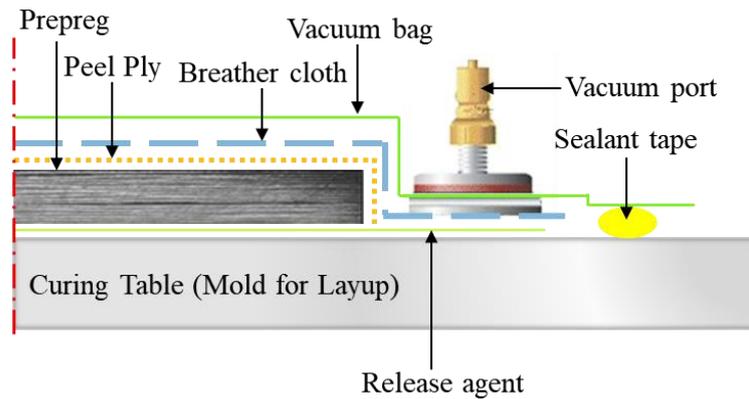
Vacuum bagging scheme for Twill CFRP prepreg
